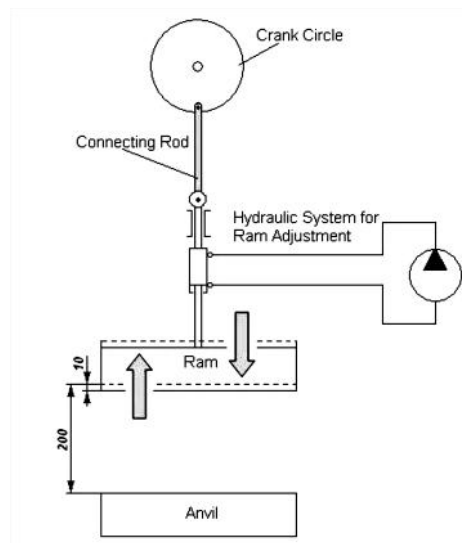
Ram Adjustment Mechanism of the Forging Press [11]
